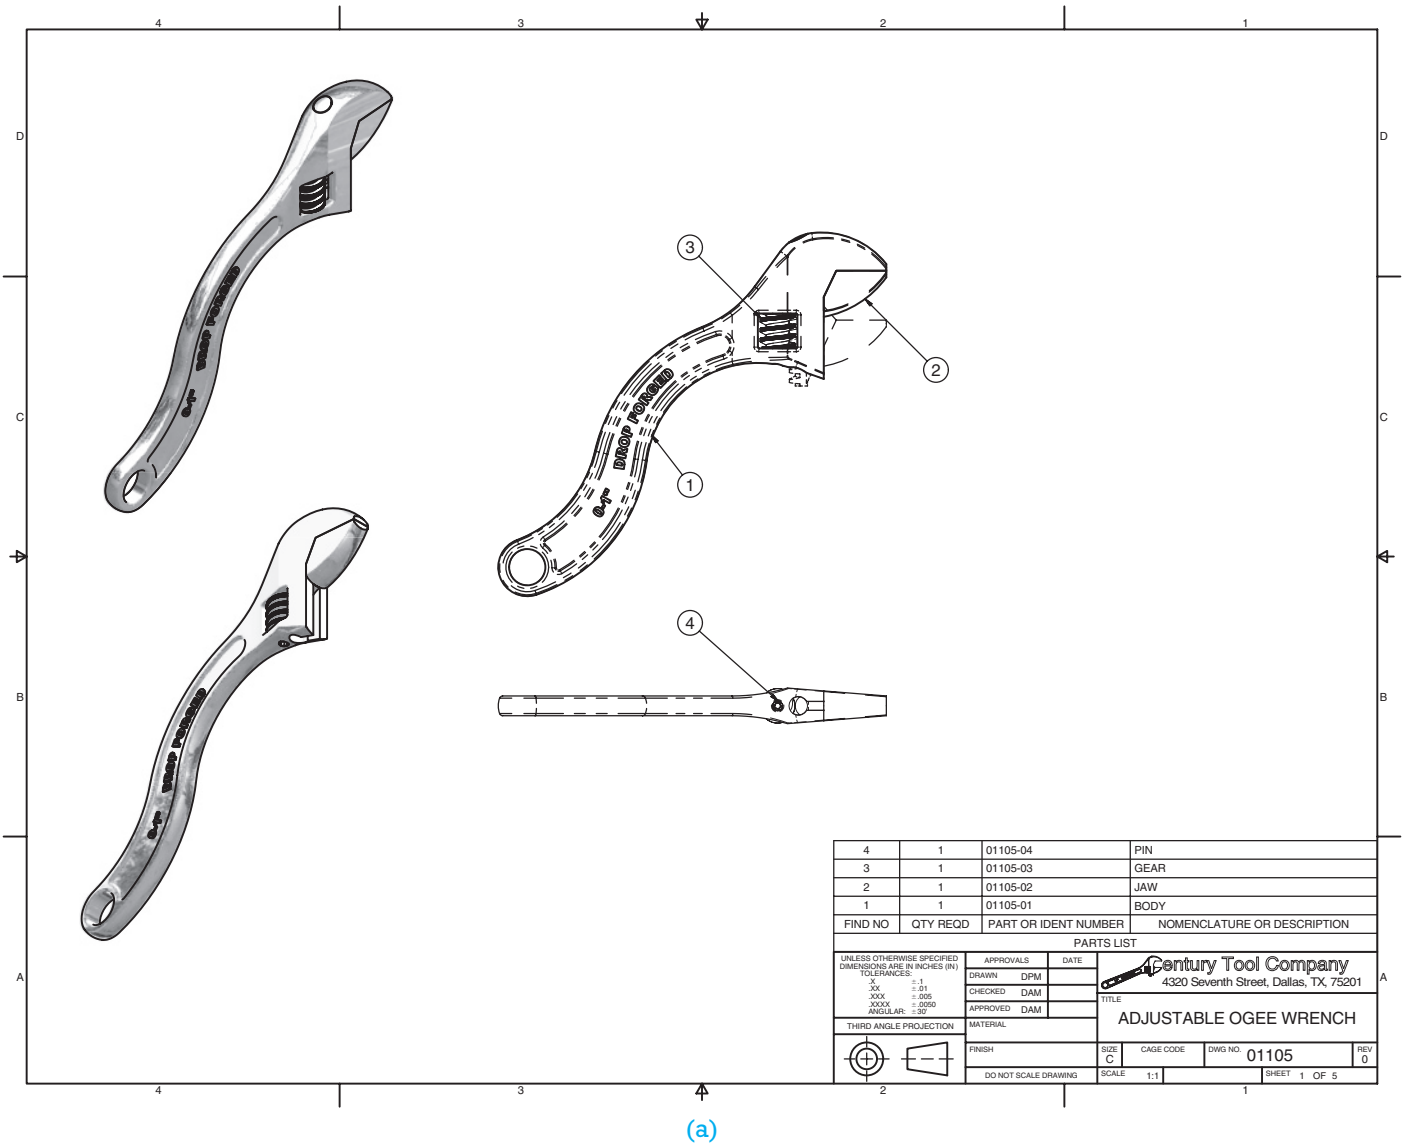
A set of working drawings for the new wrench design. (a) Assembly drawing and parts list. (Continued)
